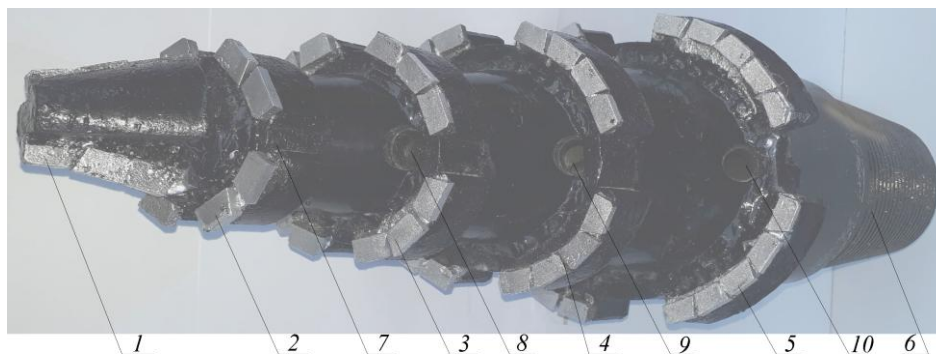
A boring tool with cutting bit from a BK6 carbide plate
